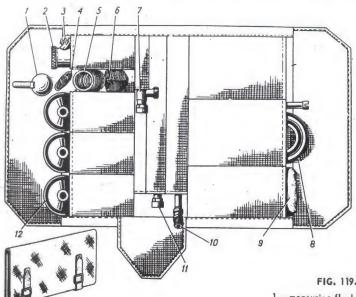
ARRANGEMENT OF SET AK-46 IN BAG
